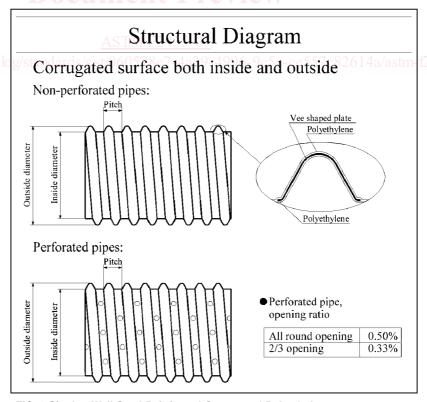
Single - Wall Steel Reinforced Corrugated Polyethylene Pipe
